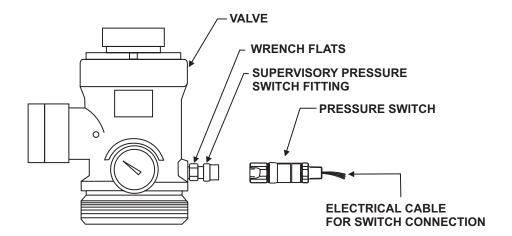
Installation of Supervisory Pressure Switch (Up to 2½ in. Valve)
